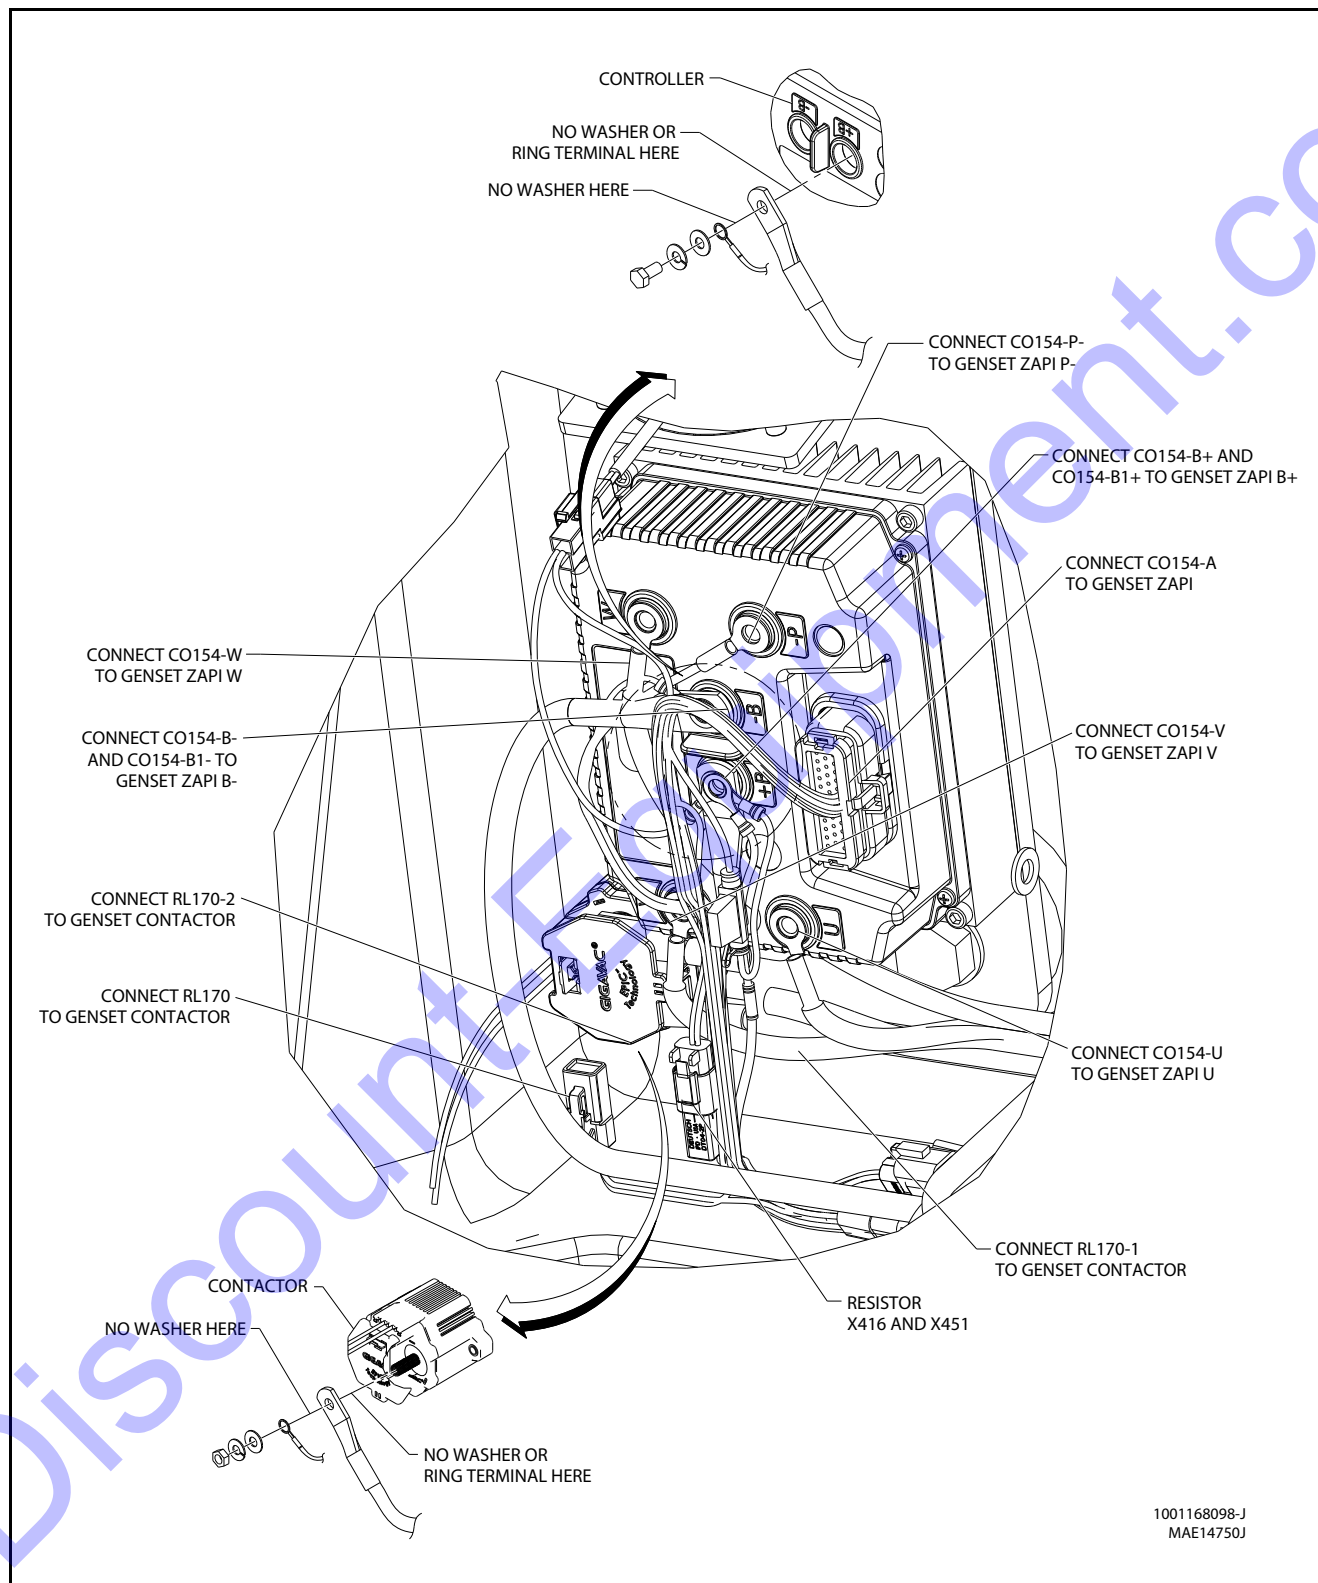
Engine and Generator Electrical Components - Sheet 4 of 4
